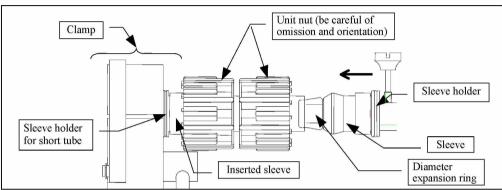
Parts arrangement (10 - 25, W3 - W8)
